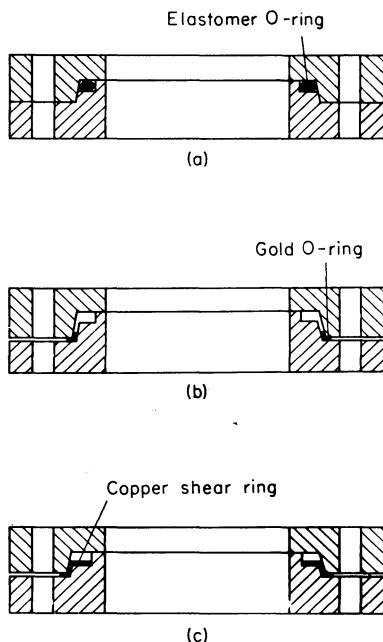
Cross section of a pair of mating convertible flanges: (a) used as a step seal with elastomer O-ring; (b) used as a corner seal with gold wire; (c) used as a friction seal with copper gasket. Reproduced from Marton⁸²¹ (*Courtesy of Pergamon Press*)
